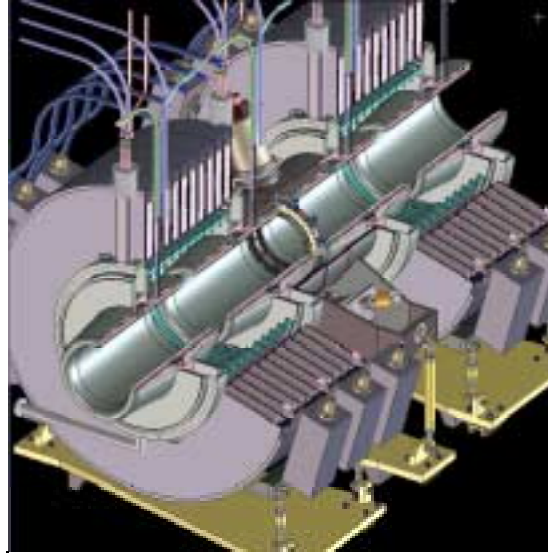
Cutaway view of proposed induction linac module with superconducting solenoid coils on the inside.
